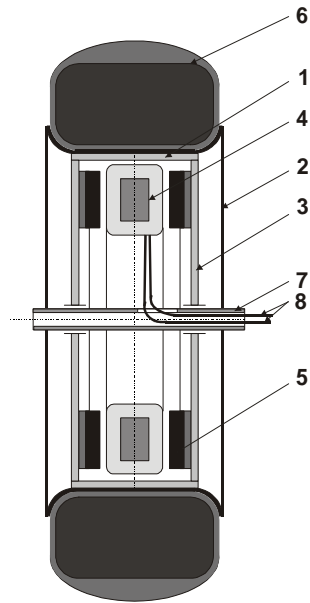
(b) Wheel with Hub motor: 1 – torus motor, 2 – wheel rim, 3 – rotor, 4 - stator, 5 – permanent magnet, 6 – tire, 7 – wheel axel, 8 – supply wires
